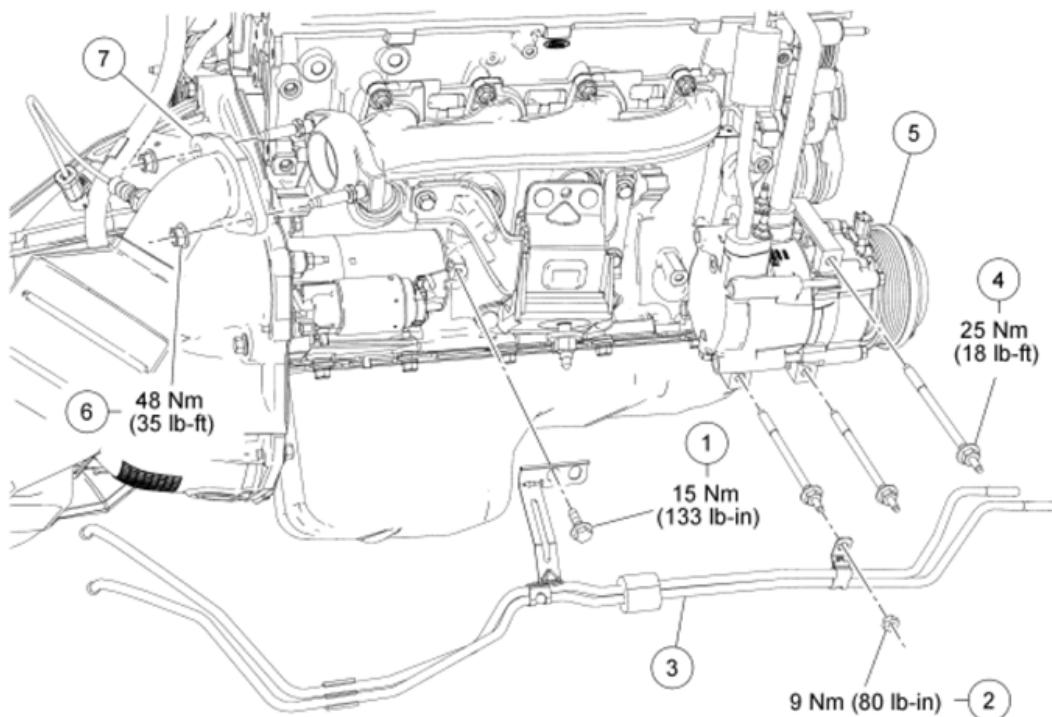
Identifying Exhaust Manifold Components - RH (View 1 Of 3)
